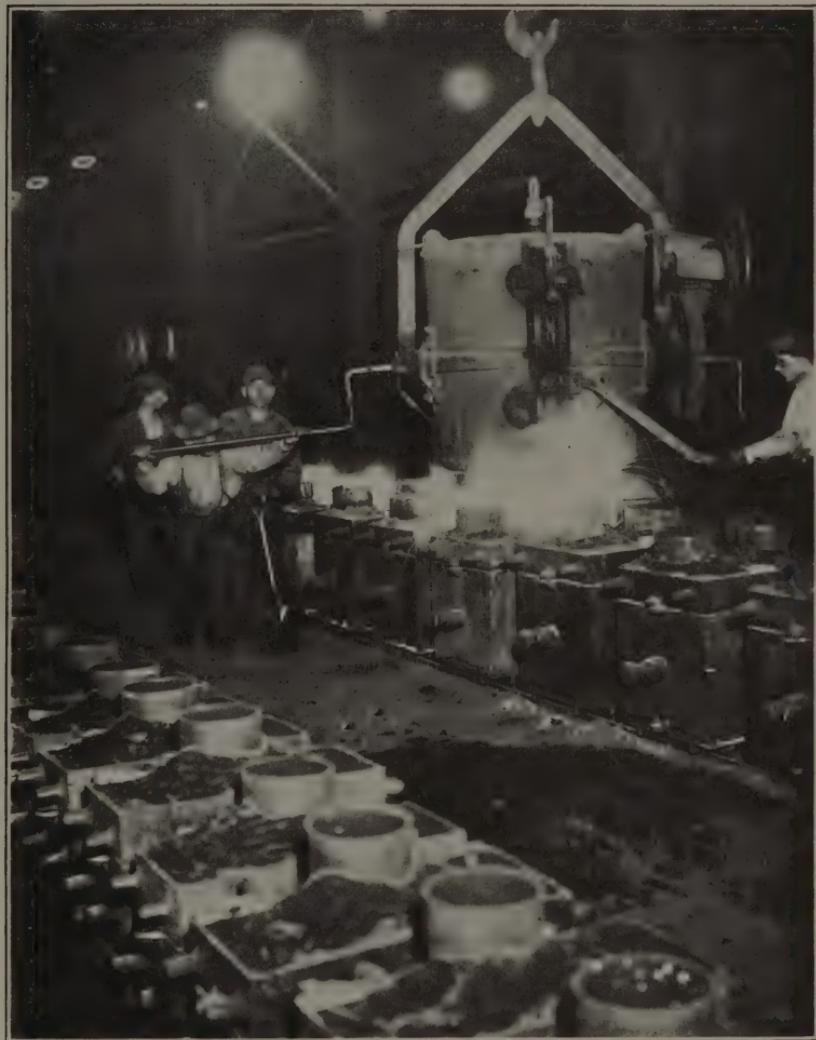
Pouring from bottom ladle. Only the operator is wearing protective goggles.
